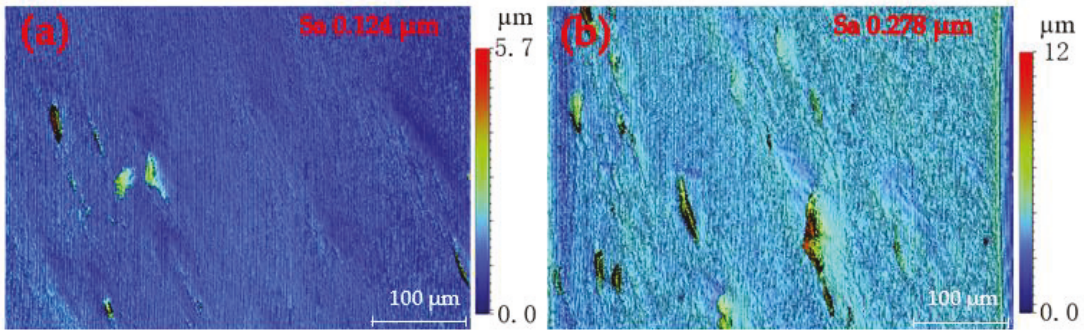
Machined surface morphology captured by means of the white light interferometer in (a) minimum quantity lubrication machining (MQLM-oil) and (b) high-pressure gas machining (HGM) environments.
